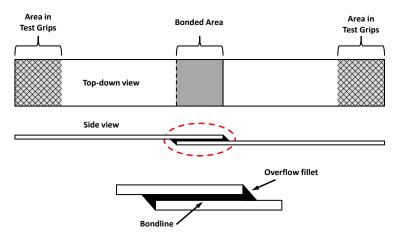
Adhesively bonded single-lap-joint test specimen configuration (refer to ASTM D1002-10 for dimensions)
